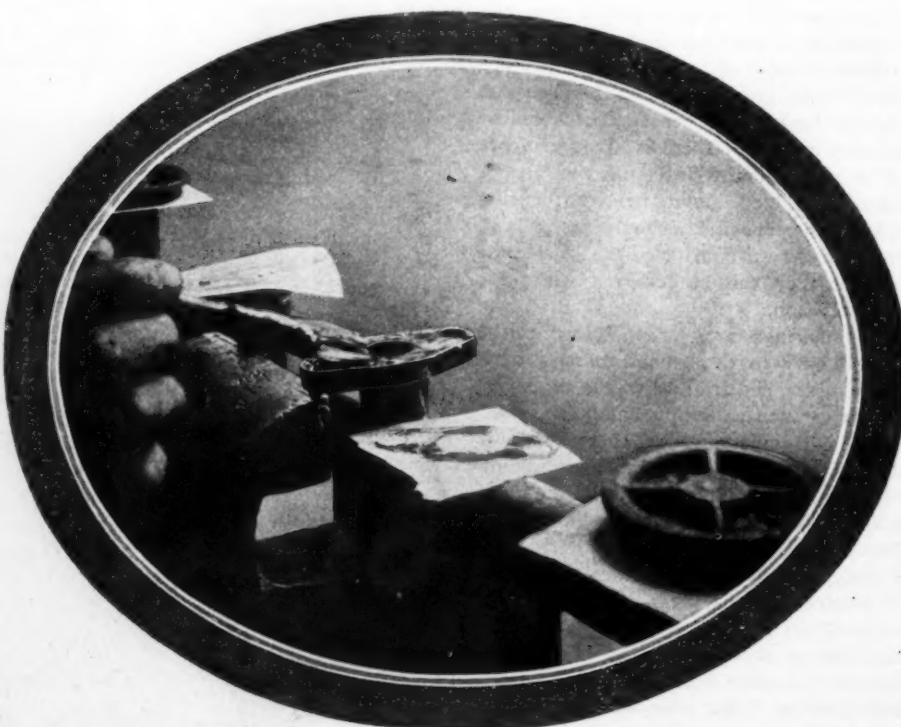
Showing a manifold with the asbestos fabric which is used for packing in place, being held by cement, also showing how the impression of the packing is taken by hammering against the edges of the flange
